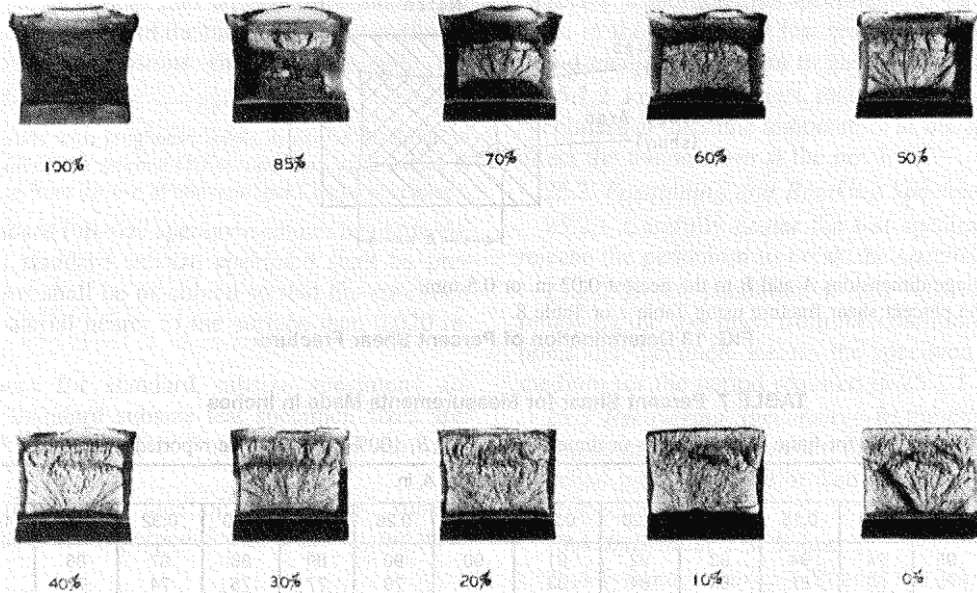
Fracture Appearance Charts and Percent Shear Fracture Comparator
